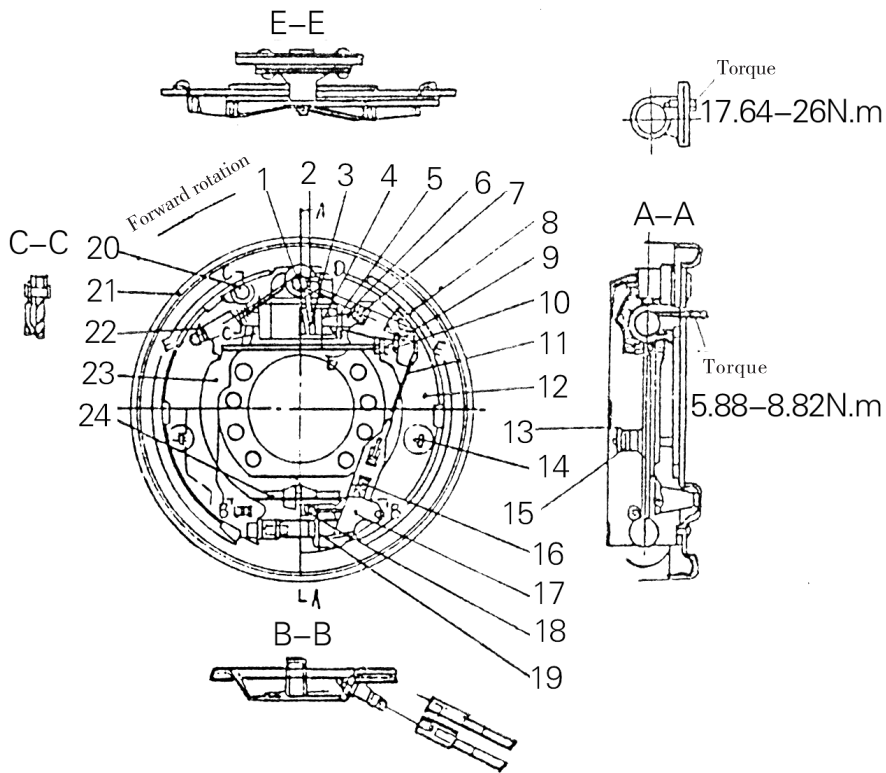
Wheel brake for 3, 3.5 and 3.8 ton trucks
